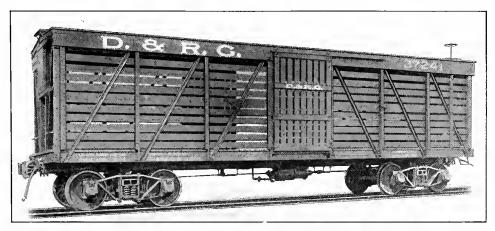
Steel Frame 40-Ton Capacity Stock Car. Weight, 35,000 lbs.; Inside Length, 36 ft. 6 in.; Inside Width, 8 ft. 6 in.; Inside Height, 7 ft. 3 in. Builder, American Car & Foundry Co.
